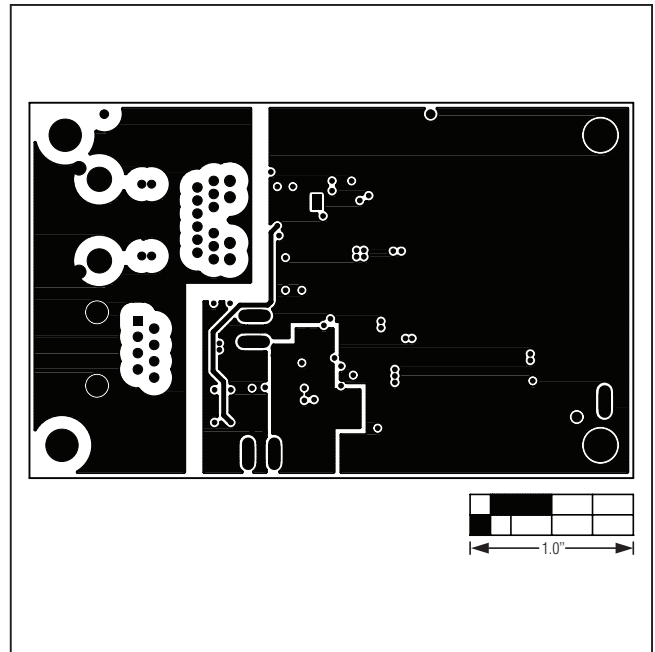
MAX5974E EV Kit PCB Layout—GND Layer 2
